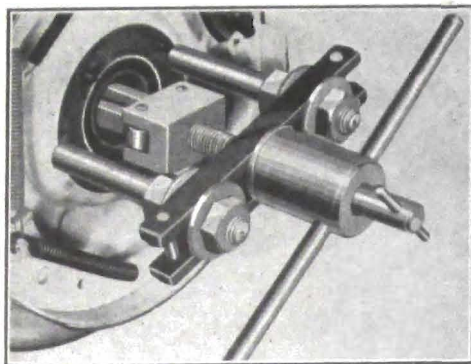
Axle Bearing and Retainer Puller J-528-B
